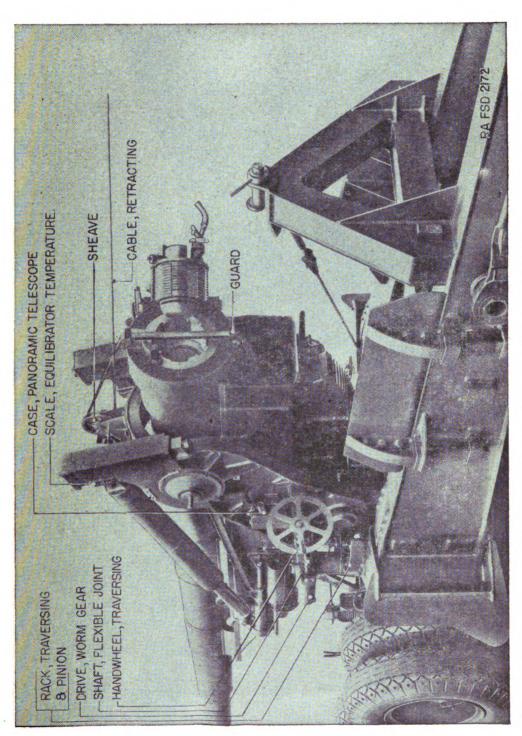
155-mm gun carriage M1-retracting the gun.
